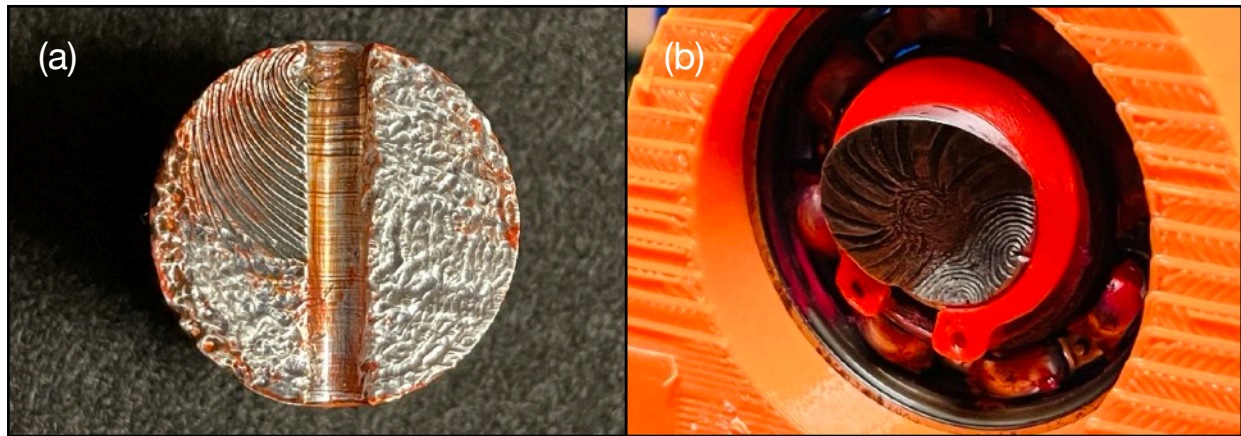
Sample fracture surfaces that mimic textbook schematics for (a) rotating bending fatigue with corrosion, and (b) torsional fatigue failure.
